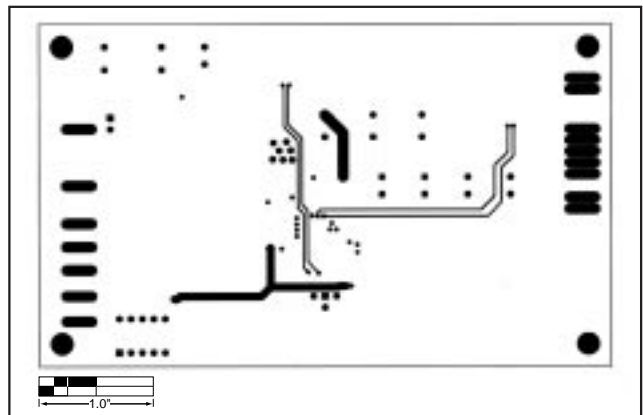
MAX1624 EV Kit PC Board Layout—Internal Signal Plane (layer 3)
